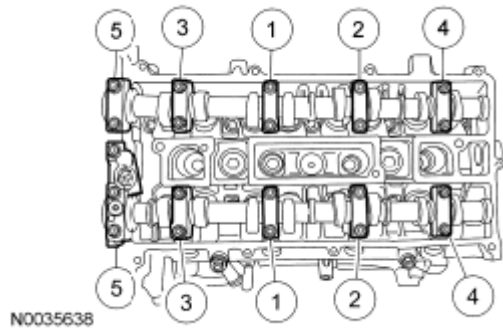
Identifying Camshaft Bearing Cap Bolt Tightening Sequence
